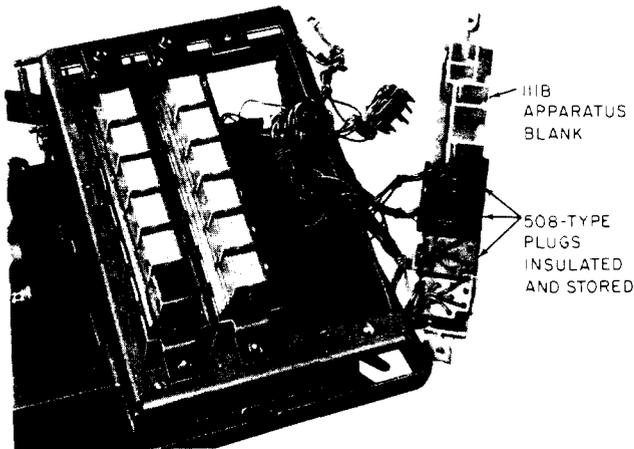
Insulating and Storing 508-Type Plugs on 111B Apparatus Blank
